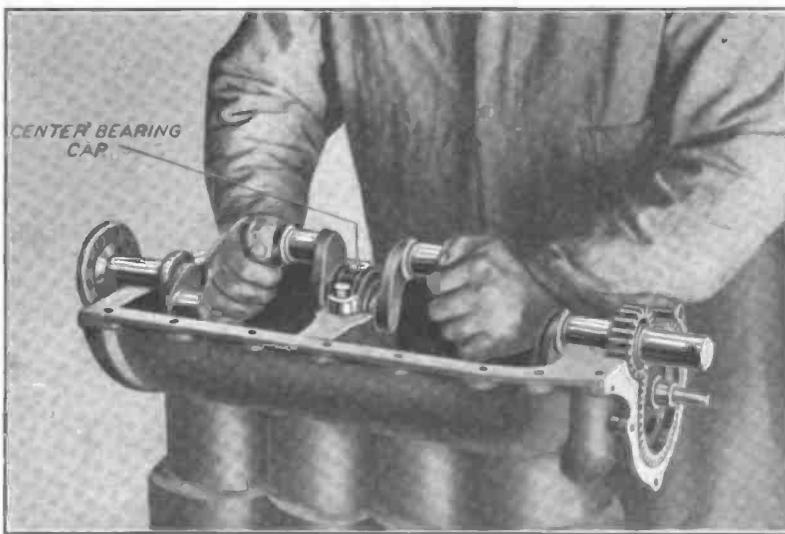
Showing method of testing main bearings when refitting by rocking the crankshaft by hand
